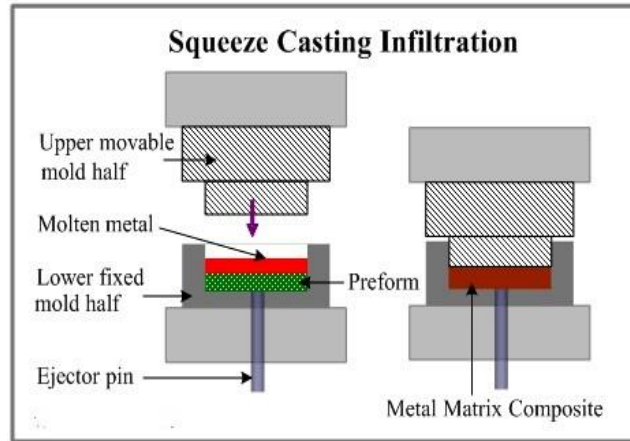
Squeeze casting Infiltration [www.substech.com]
